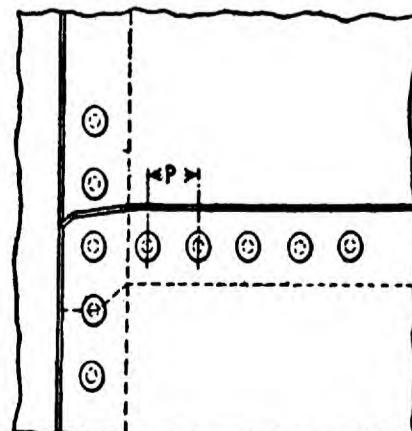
Example of Lap Joint, Longitudinal or Circumferential, Single-Riveted.
